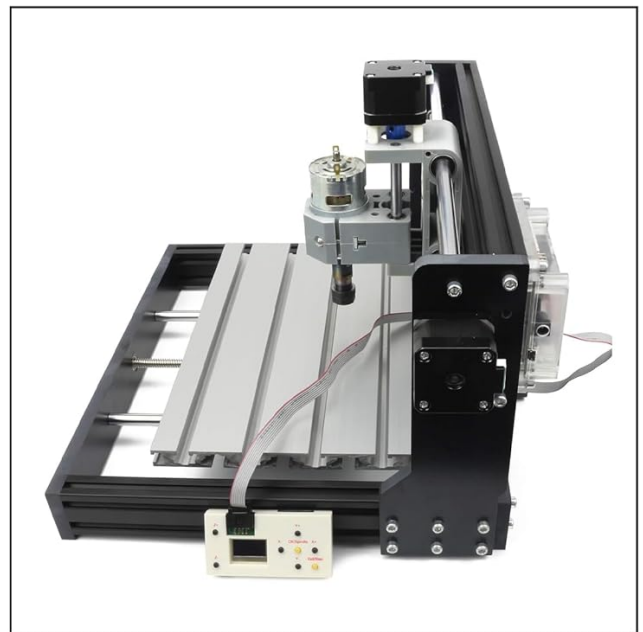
The 775 spindle motor, capable of 10000 RPM, with an ER11-3.175mm drill clamp.
